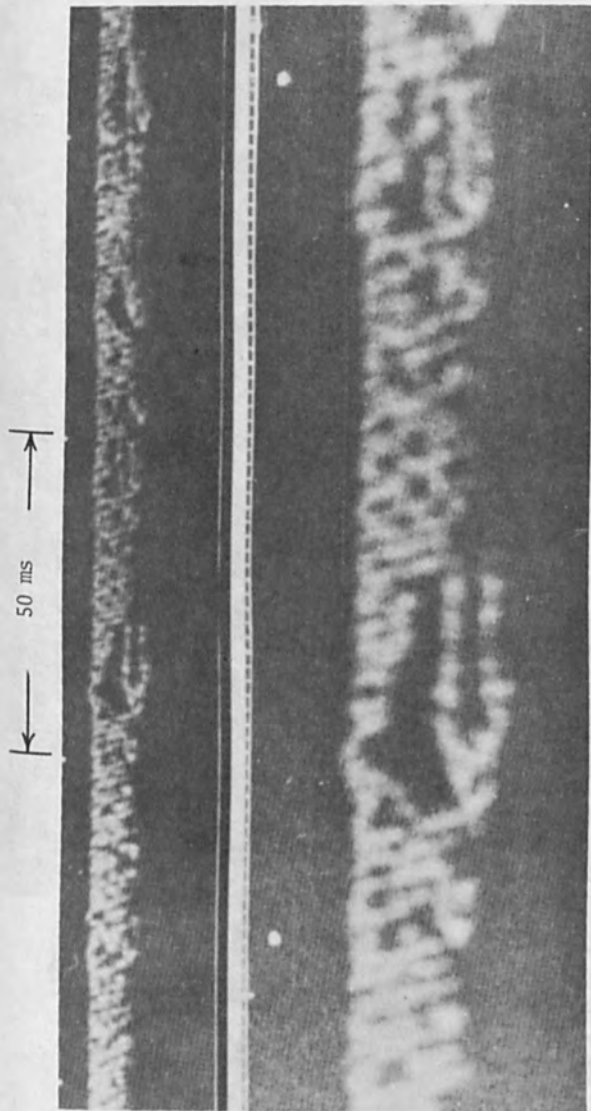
X-ray exposure and enlargement of a weld (122 kv, 10 ma, 21 ipm) on 2024 aluminum showing a breakdown in the closure mechanism producing a spike.<sup>4</sup>
